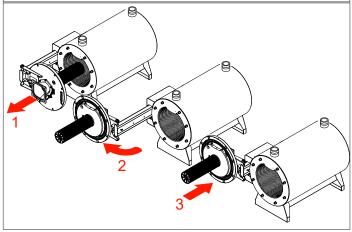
1500 - 2000 Model Heat Exchanger Detail - Sliding Out the Combustion Assembly
